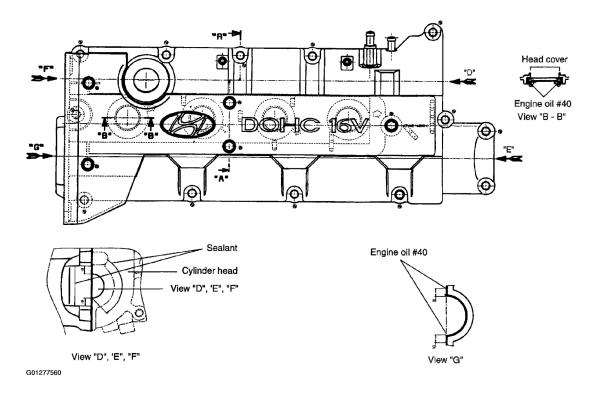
Installing Cylinder Head Cover Courtesy of HYUNDAI MOTOR CO.
